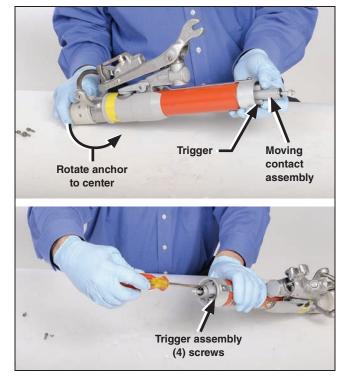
With the moving contact extended, turn the anchor to align the holes in the trigger with the holes in the inner tube assembly. Attach the trigger assembly to the inner tube assembly.
